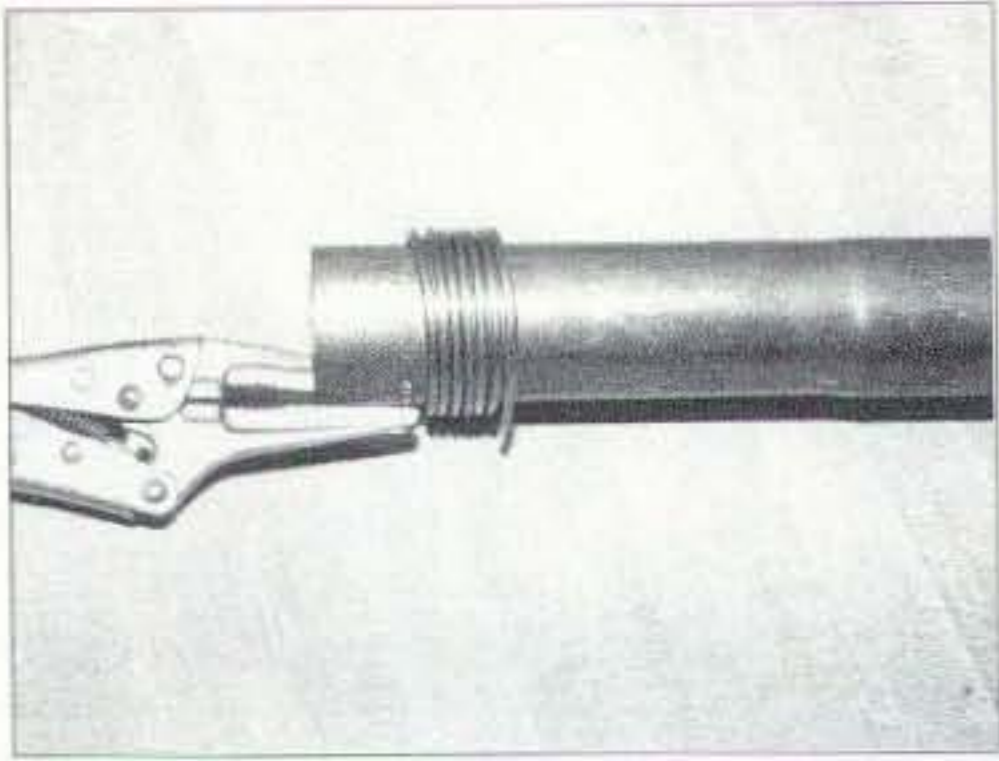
Photo D. Close-wind a 40-inch length of #10 solid copper wire on a 1-1/2-inch OD form. I used a tailpiece from a kitchen sink drain line that measured exactly to size. The locking pliers secured one end during the winding process.
